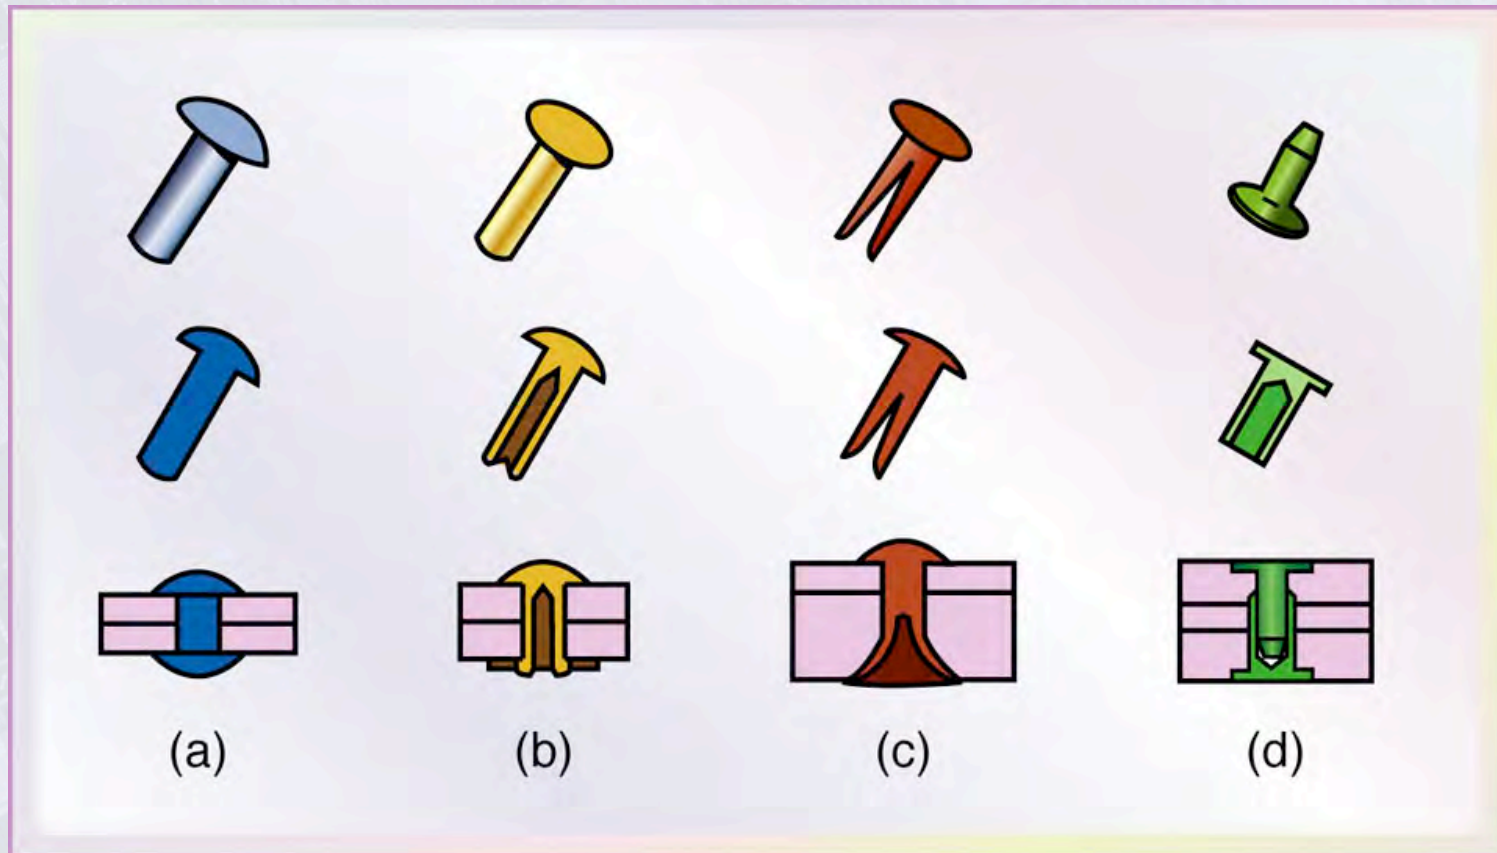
Examples of rivets: (a) solid, (b) tubular, (c) split or bifurcated, and (d) compression.
